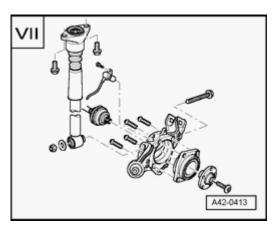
Wheel Bearing Housing (Aluminum) - All Wheel Drive Courtesy of VOLKSWAGEN UNITED STATES, INC.
